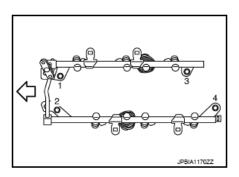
Fuel Tube Mounting Bolts Loosening Order Courtesy of NISSAN MOTOR CO., U.S.A.
